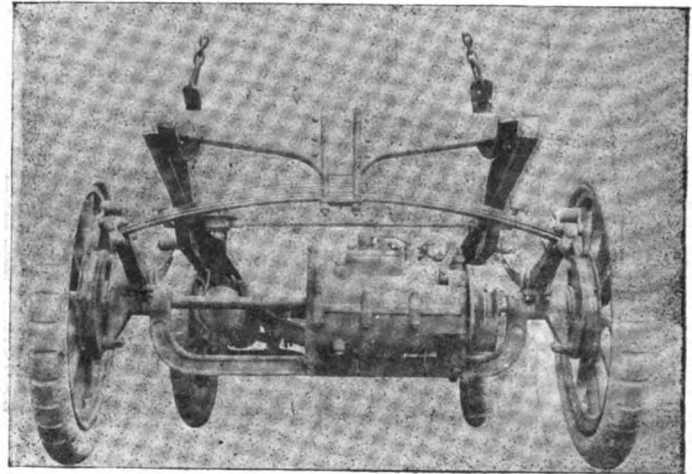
Rear View of Chassis of Darracq 18-h.p. Car, showing the H-section back axle, change-speed gear and differential box.
